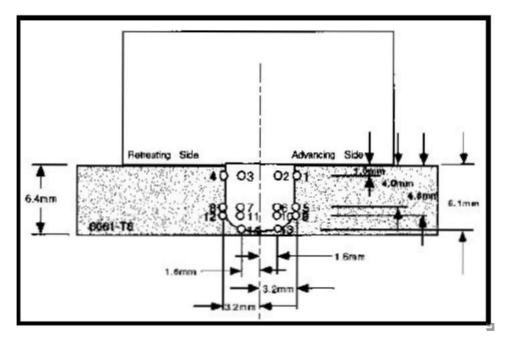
Tracer line positions for 6.4 mm Aluminium 6061-T6 plate. The groove containing the steel shot tracer material was oriented at various positions relative to the welding tool pin and at depths in the work piece plate.
